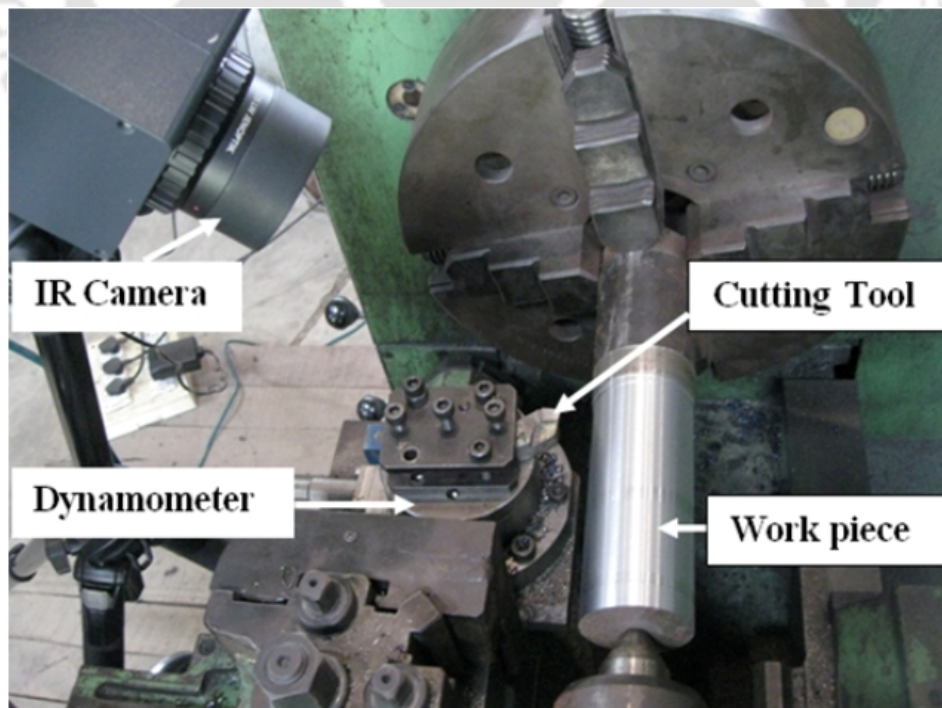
View of the machining in a lathe with dynamometer and infra red camera
